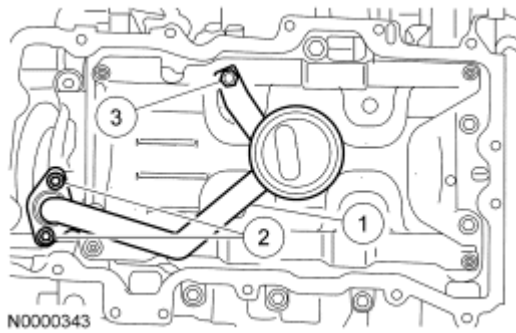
Identifying Oil Pump Screen, Pickup Tube & Bolts
